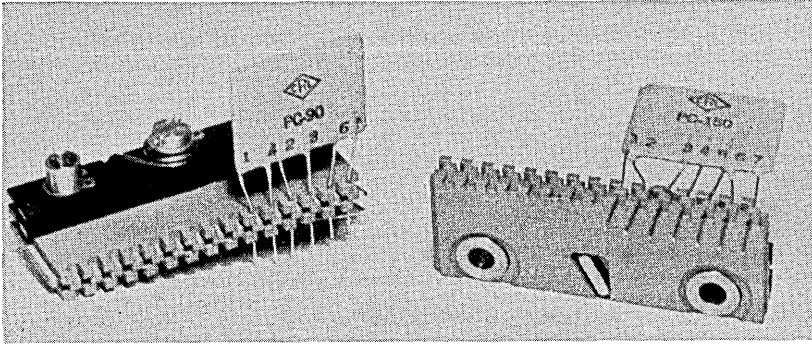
Multilead component mounted on carriers; the component carrier has indexing holes and can be coded for automatic loading
